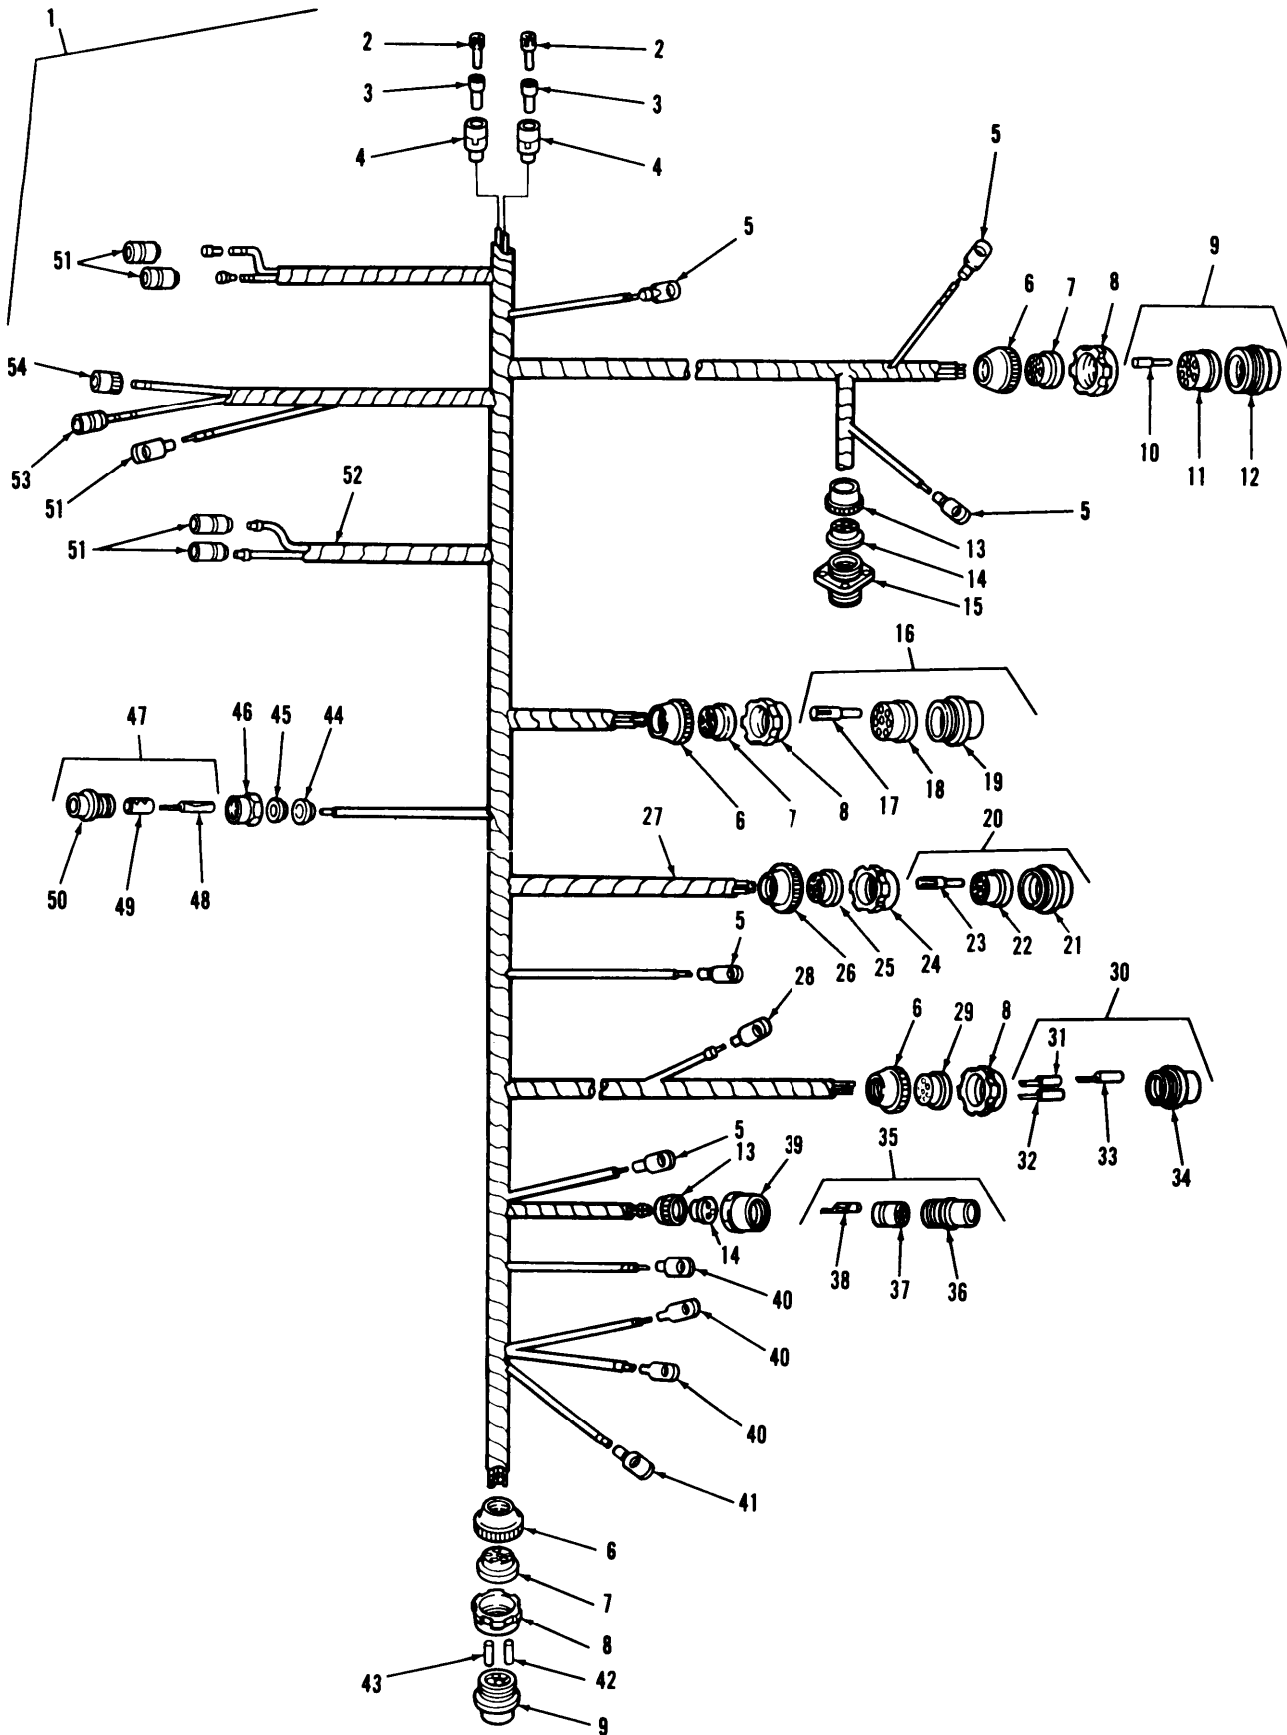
FRONT MASTER CONTROL HARNESS ASSEMBLY (2CA ENGINE).
